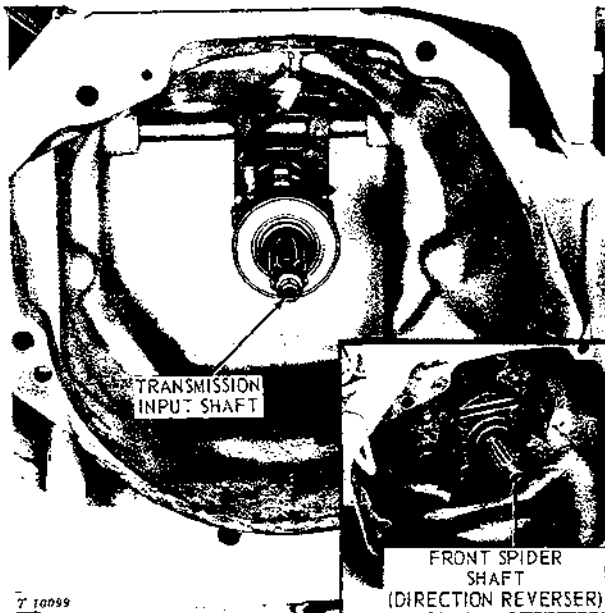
Transmission Input Shaft Indexing Point
